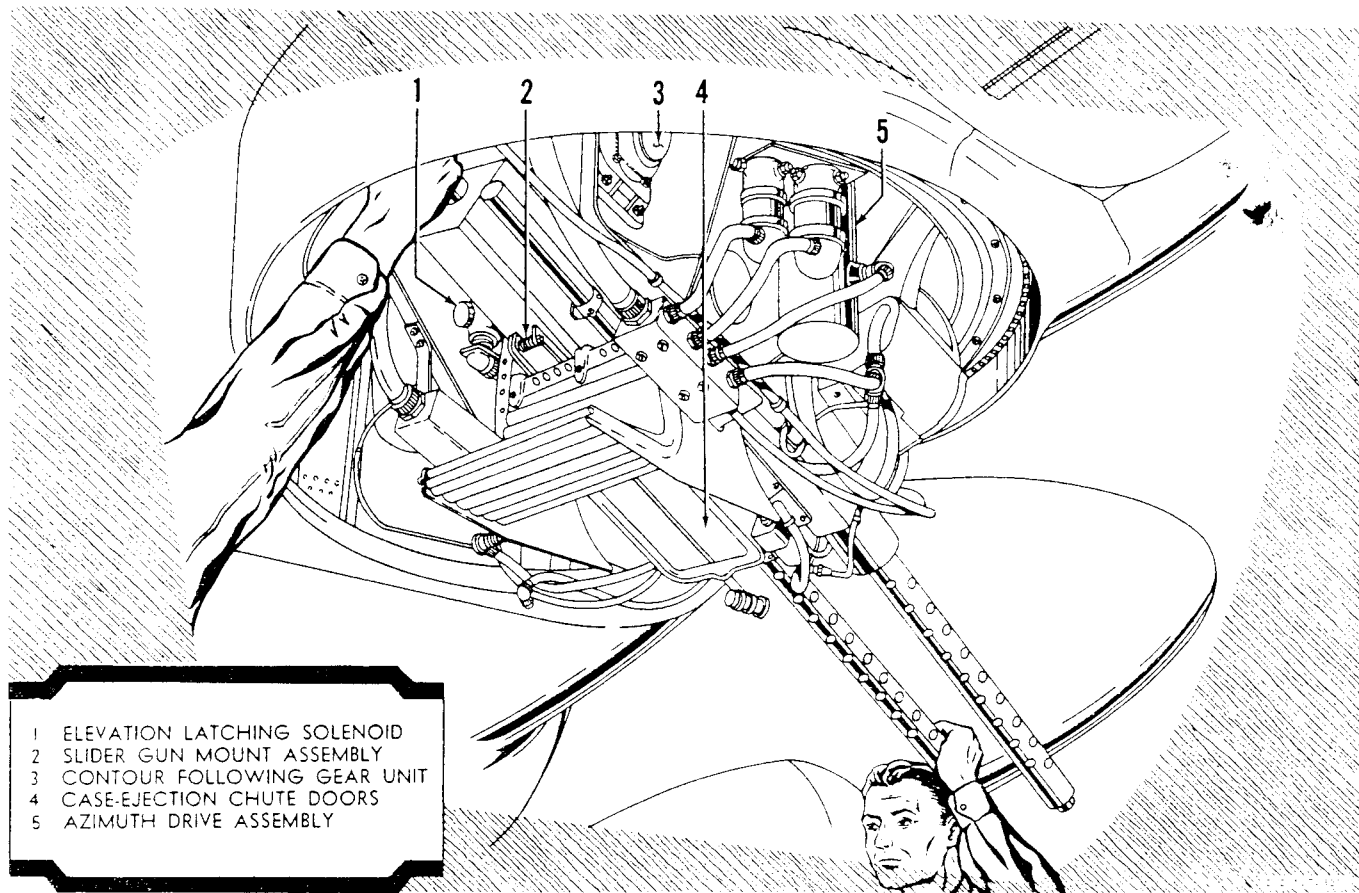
Lower Turret Guns Installation and Removal (View 3 of 3)
